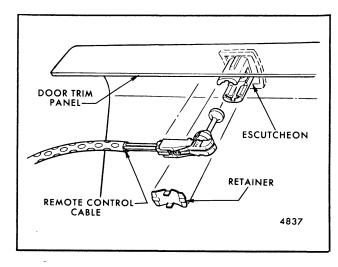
Remote Mirror Cable Attachment - "A-57" Style
